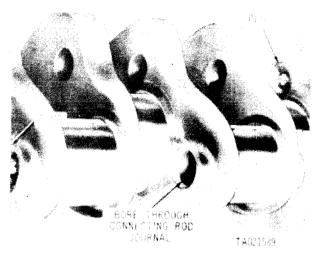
Removing or installing crankshaft oil retaining plugs.
